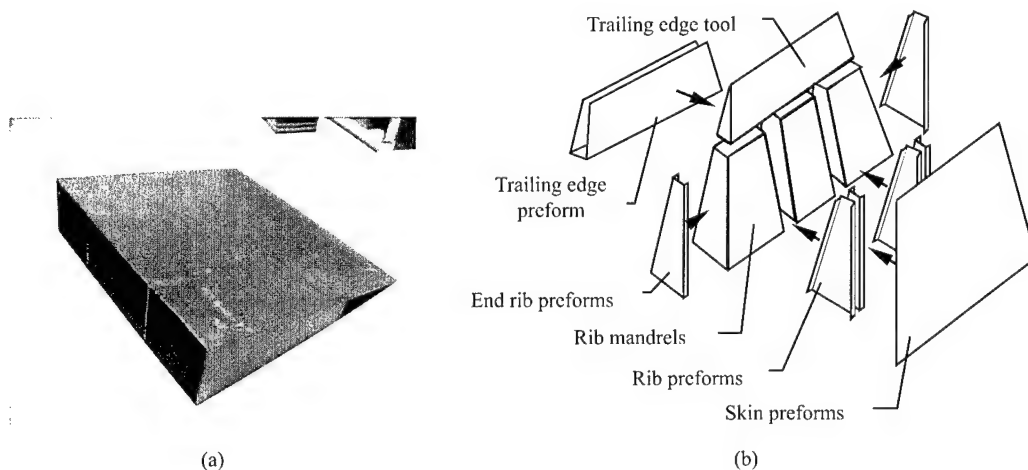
(a) A co-moulded bond 3-bay aft-box and (b) tool for lay-up.
